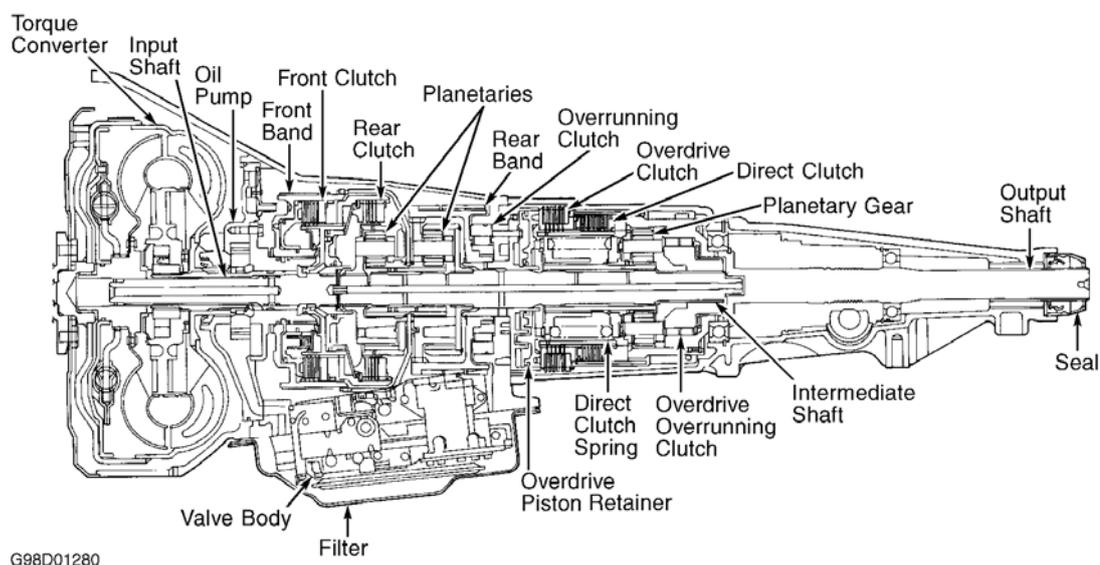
Identifying Transmission Component Locations (47RE Is Shown, 46RE Is Similar)
